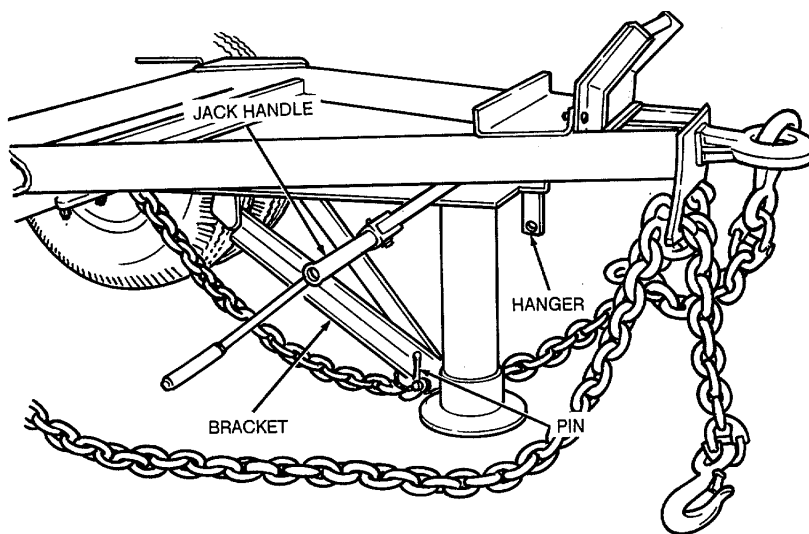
Drawbar leveling jack, installed position, serial numbers 6590 through 6629.
